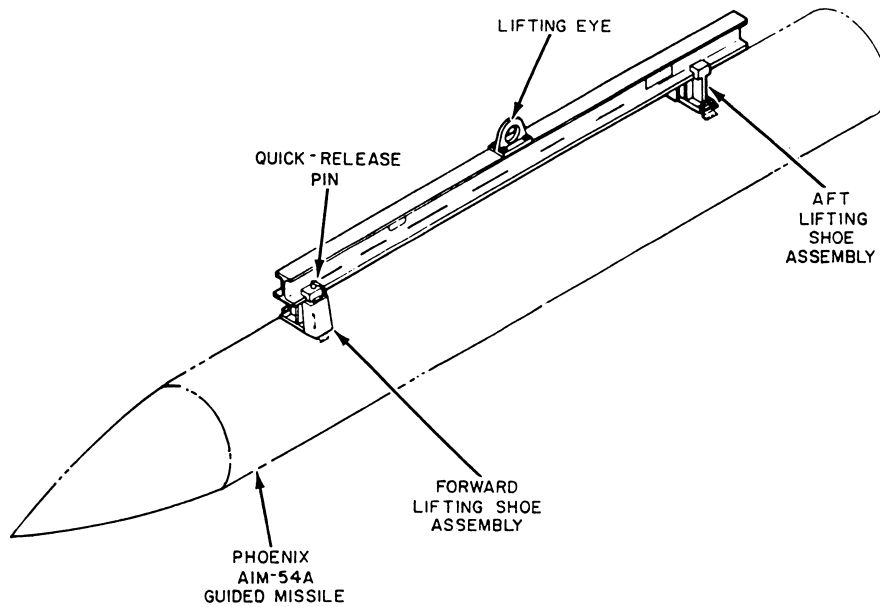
MHU-129/E guided missile hoisting beam.
